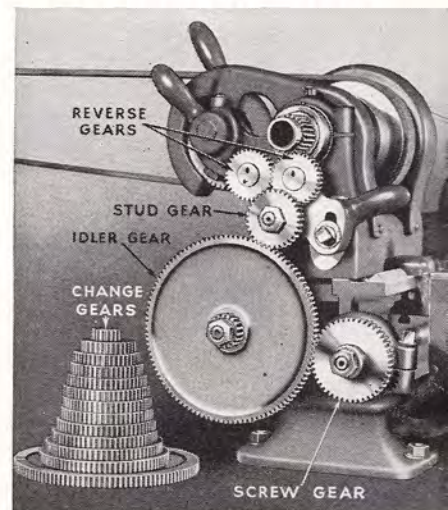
Change Gear Equipment Supplied with 9-inch "Workshop" Lathes.
